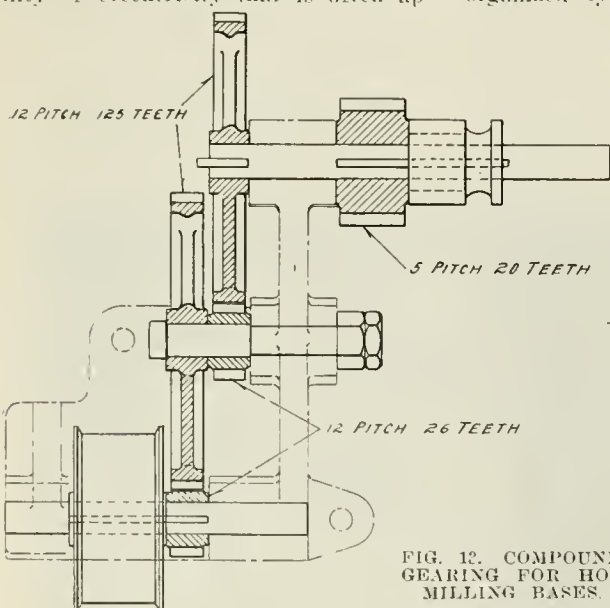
COMPOUND GEARING FOR HOB MILLING BASES.
